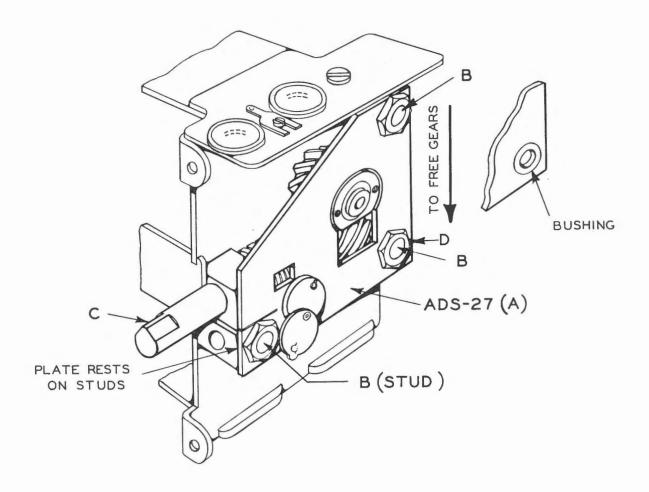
Condenser — Mounting of Adapter Plate Assembly
